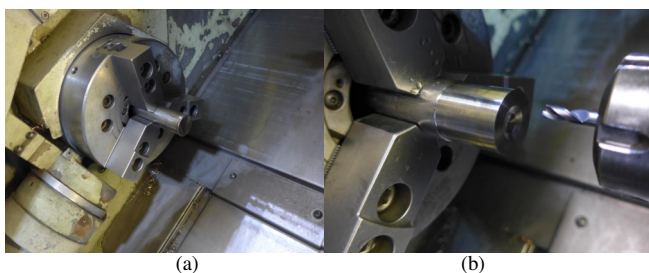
(a) Clamping the semifinished material in the lathe machine, (b) removing of the radial runout and drilling of the centering hole.
